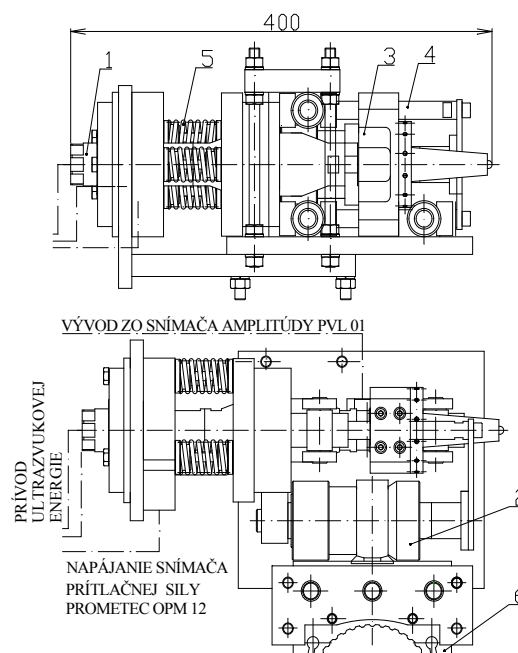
General design of ultrasonic tool. 1- ultrasonic resonator, 2- leading radial tool movement, 3 - tool, 4 – leading system, 5 –pressure spring system, 6 – gripping on machine tool.
